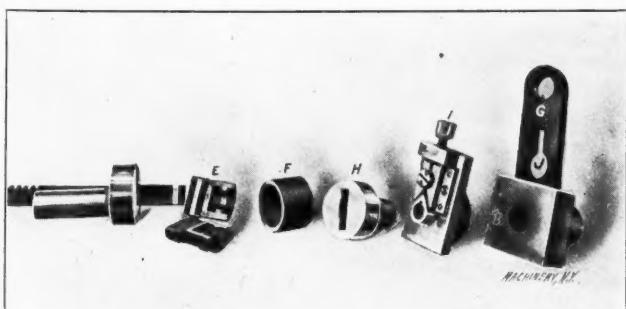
Draw-head Locks, Guide-bushings and Cam Jig used on the La Pointe Broaching Machine, Fig. 3.
